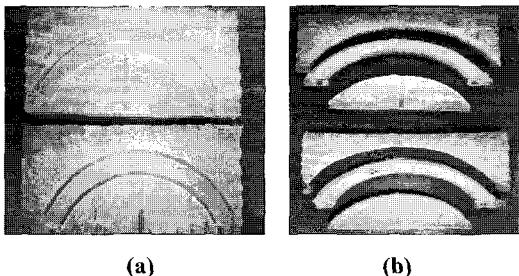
Manufactured mold: (a) two part mold; (b) six part mold
